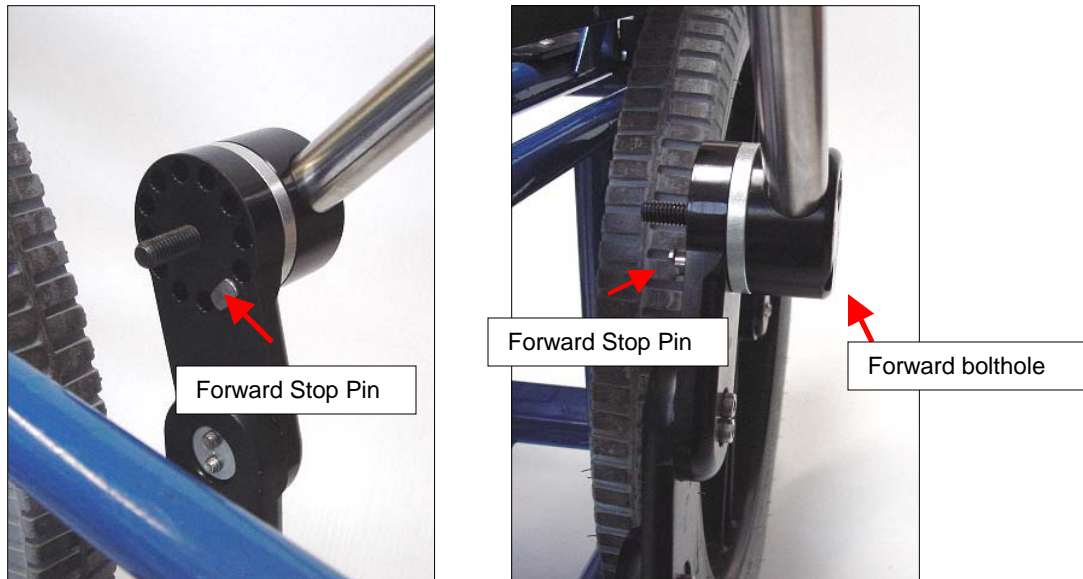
With the Side Tube held at the desired forward angle, the Front Stop Pin is inserted into the hole in line with the Forward bolthole on the RTHTM.
